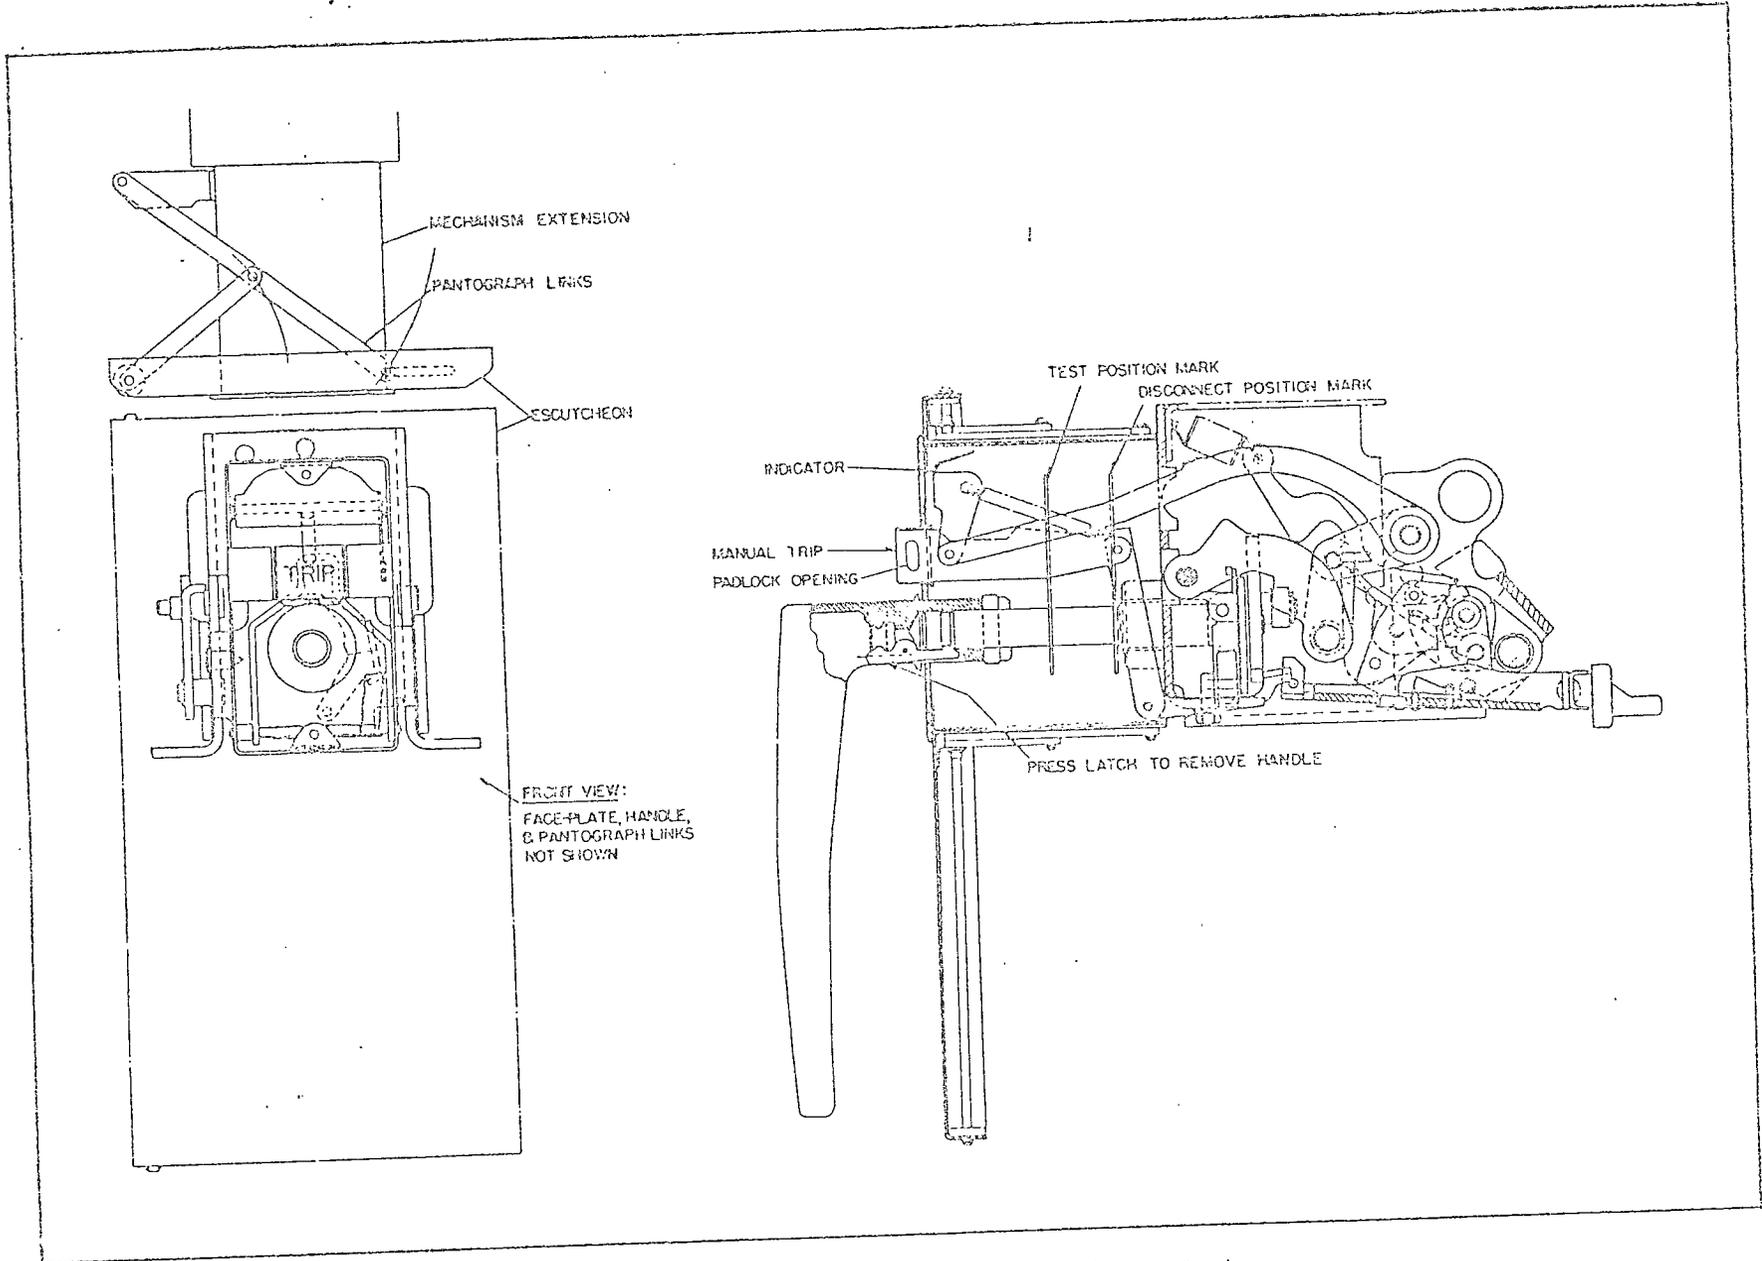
B - Type DB-50 Three Position Operating Mechanism
